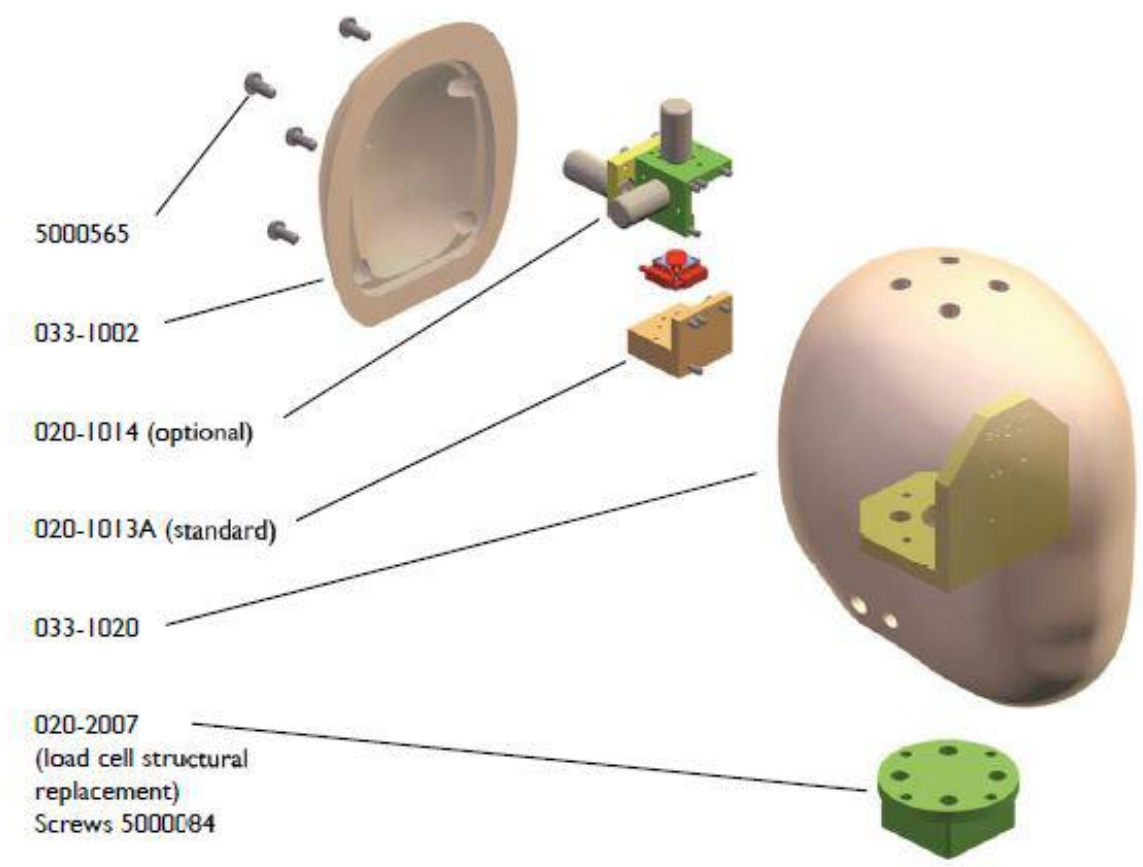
Q6 Head assembly (standard and optional instrumentation brackets shown)
